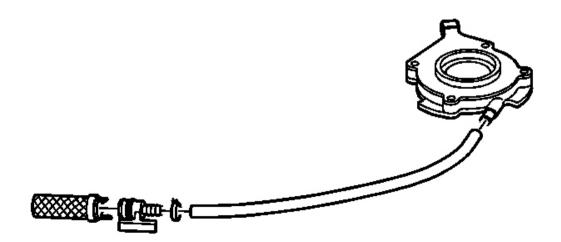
Oil Pump Hose & Oil Pump Screen Courtesy of GENERAL MOTORS CORP.
